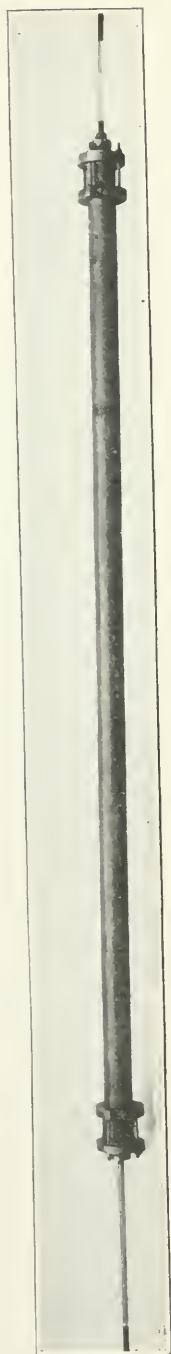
TUBE WITH END STOPPED AND WITH STAY RODS, READY TO BE PUT INTO CYLINDER FOR TEST
